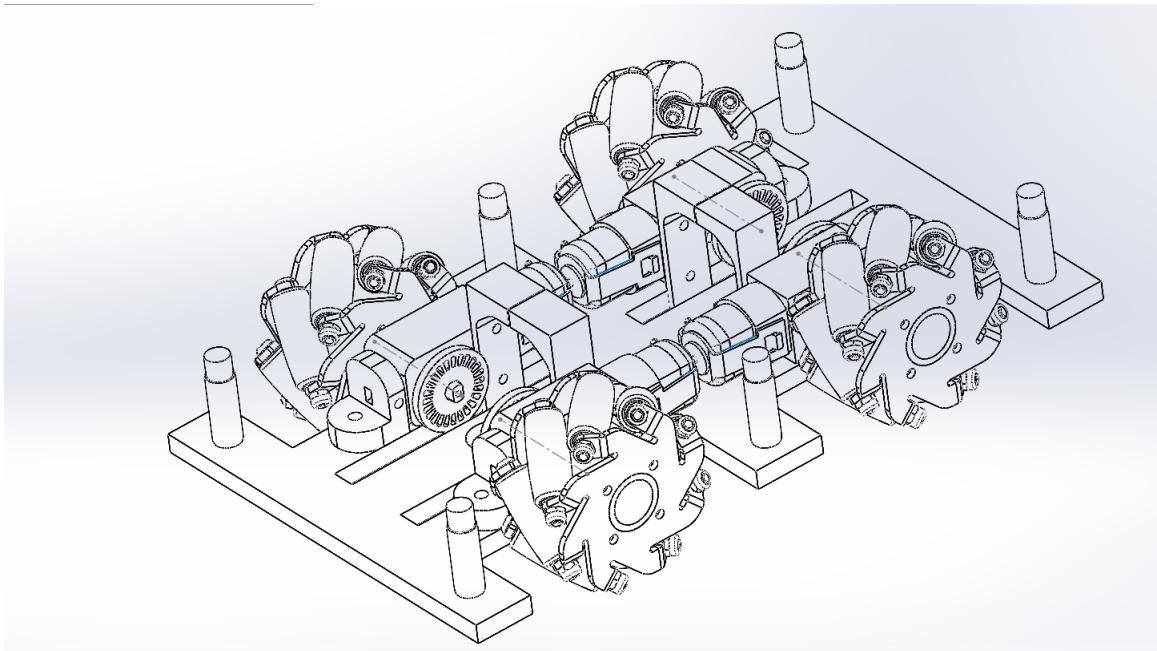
SolidWorks Model of Base chassis with mecanum wheels, motors and encoders mounted along with other supporting attachments (for stability)
